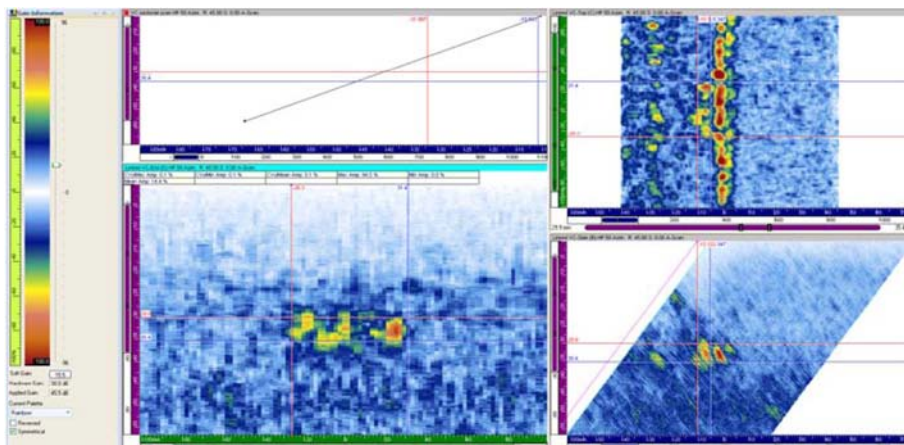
Specimen 9C-034 Flaw 2 After Weld Crown Removal at 1.5 MHz
